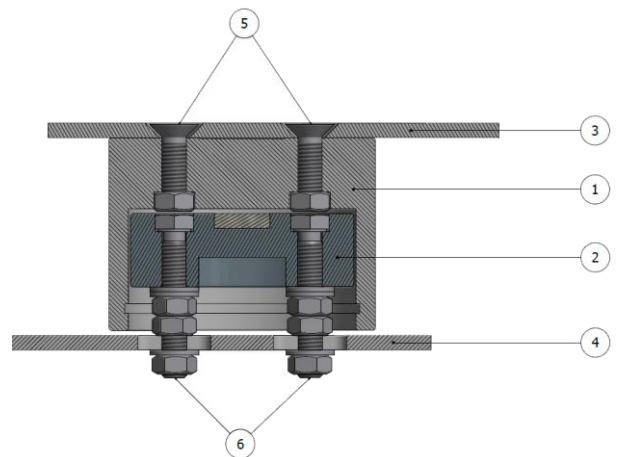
SCHEMATIC DRAWING OF WHEEL ANGLE SENSOR WHEN MOUNTED.
